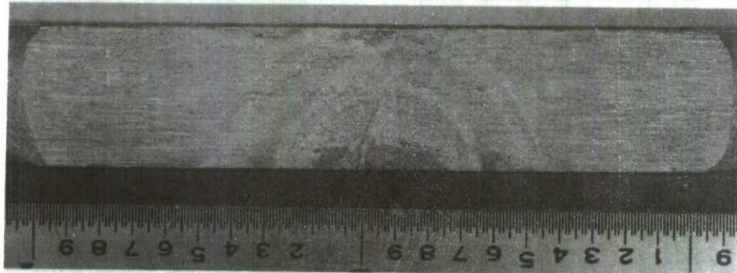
Fracture Surfaces of 7050-T73651 da/dN Surface Flaw Specimens
